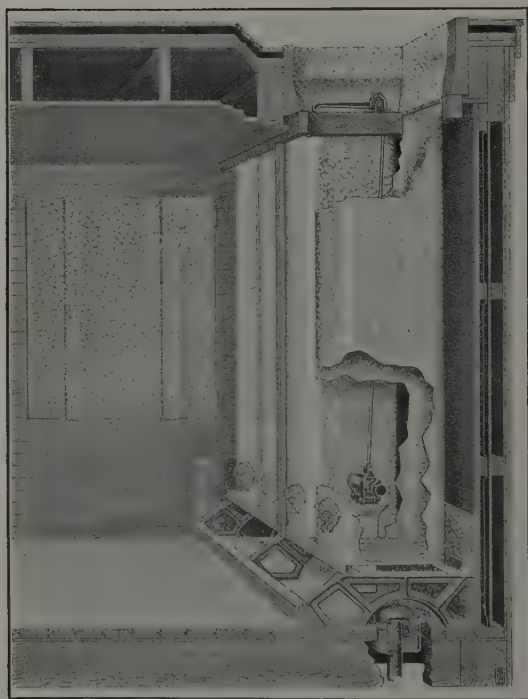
Ureco Brine Retaining Valve for Refrigerator Cars.
